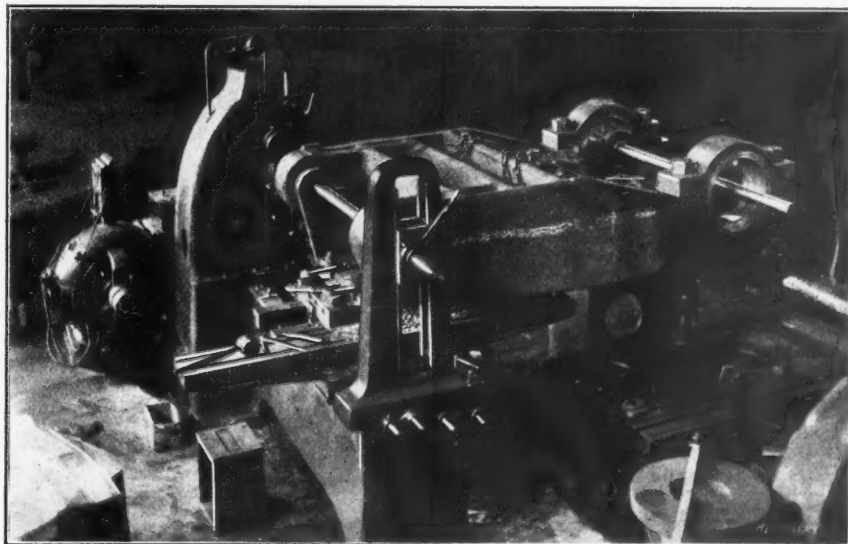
Boring a Disappearing Mortar Carriage Casting on a Universal Boring Machine
